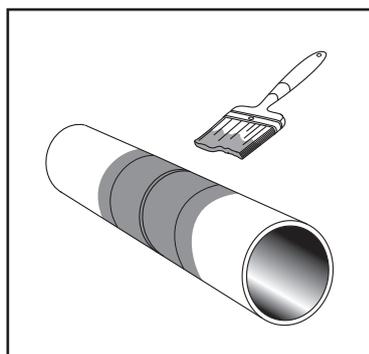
Priming butt welded joints. Apply Denso Primer D to entire area to be wrapped with tape.
